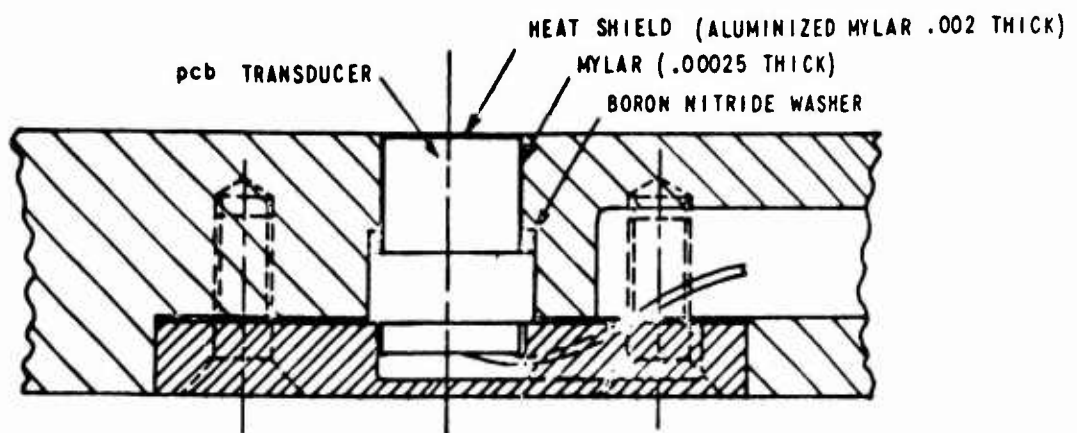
DRAWING OF SECTION THROUGH SKIN FRICTION TRANSDUCER
